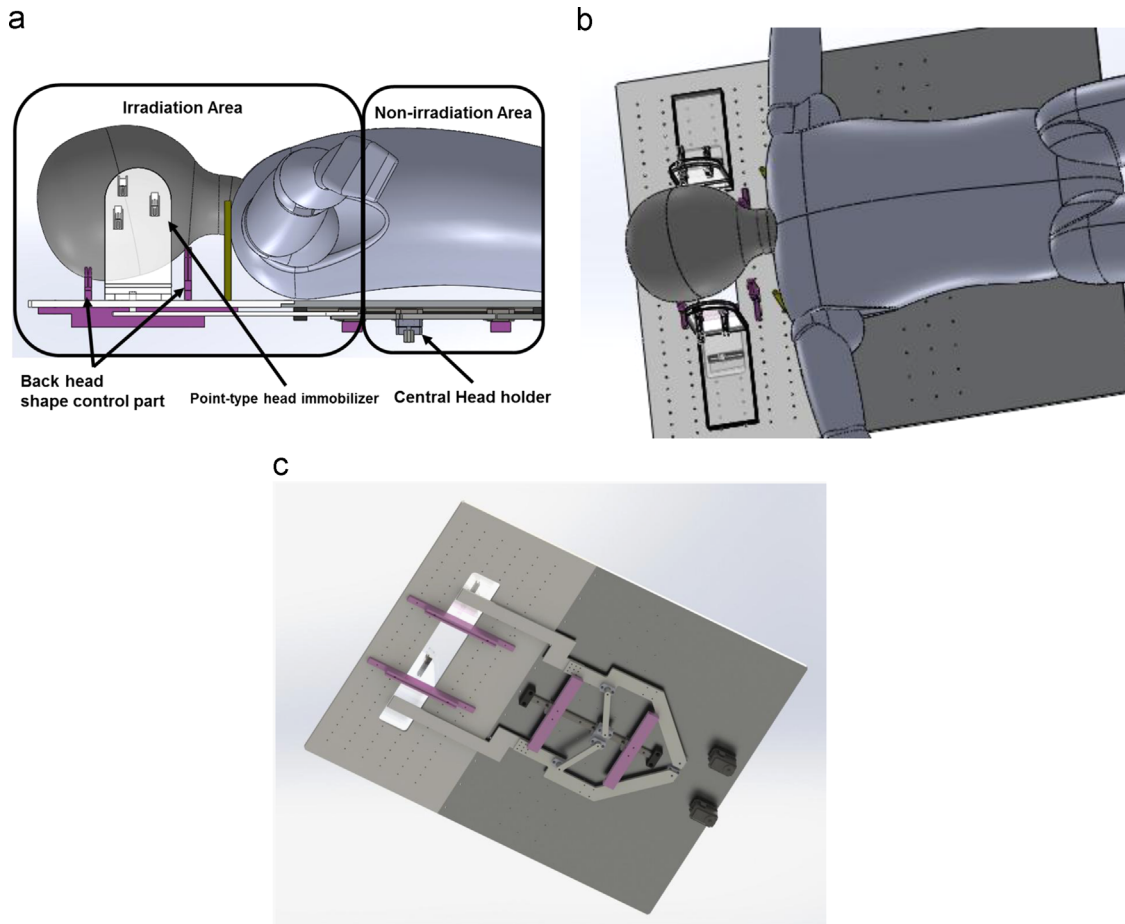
(a) Composition of head and neck immobilizer and overall view from (b) front and (c) back side of CAD model.
